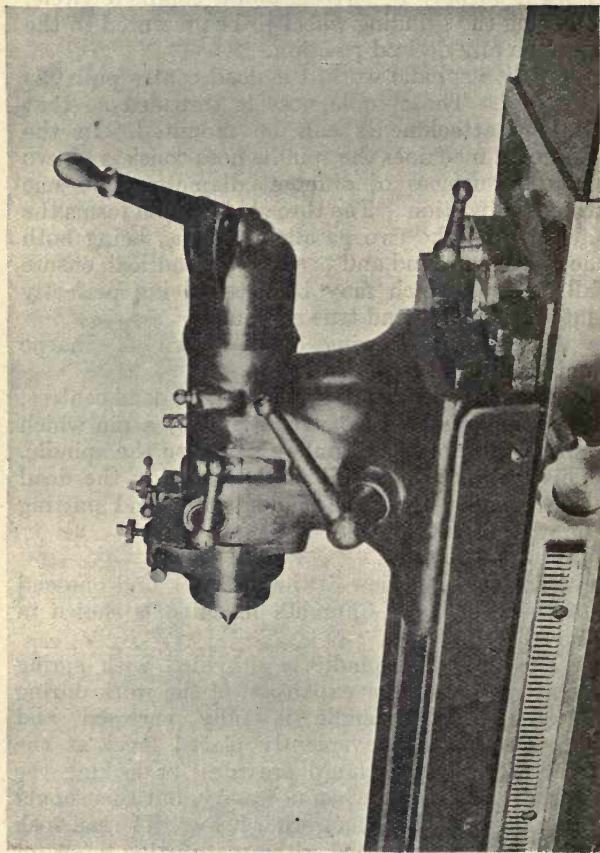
TAILSTOCK OF CHURCHILL UNIVERSAL GRINDING MACHINE
